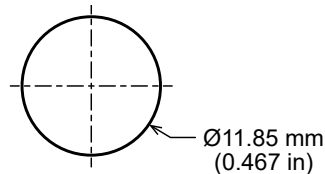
ANT-5GW-SPS1 Mounting Hole Dimensions
